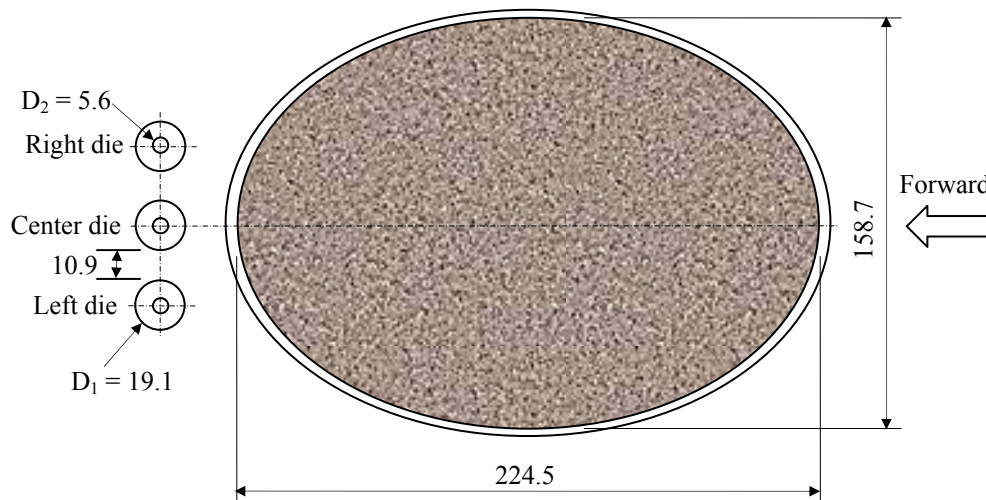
Dimensions of the toroidal dies and the feed shoe cross-section in contact with the table surface (drawn to scale) (unit: mm)
